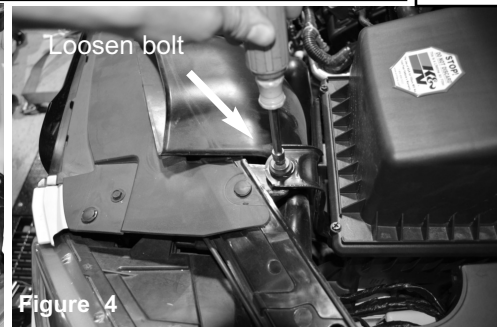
Loosen the bolt on the airbox using 8mm nut driver. Remove the plastic clip from
